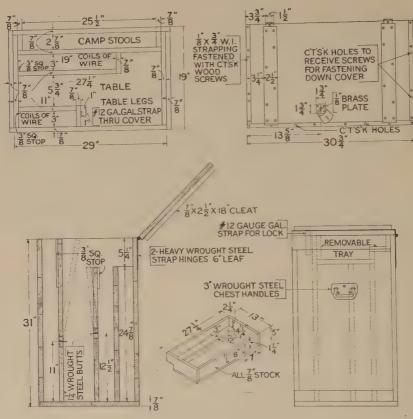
Working Drawing of Portable Test Table Box Designed by E. S. Lincoln, Consulting Engineer
